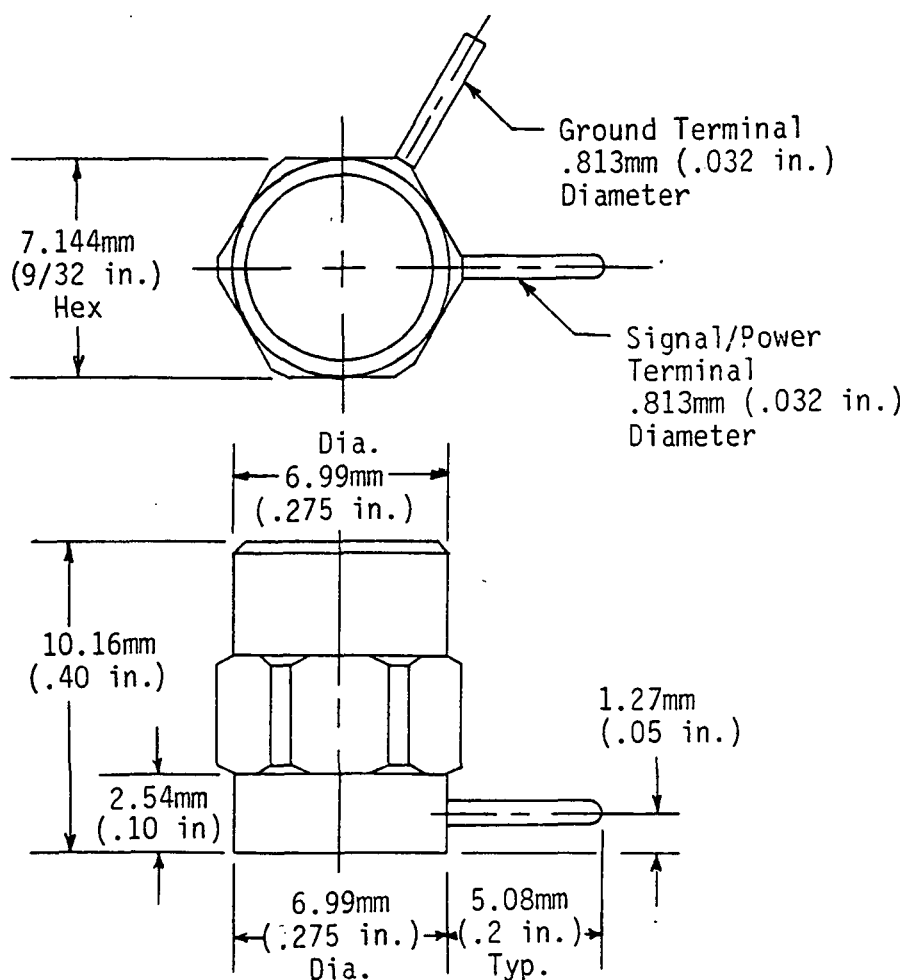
SKETCH OF PCB PIEZOTRONICS MODEL 303A03 MINIATURE ACCELEROMETER
